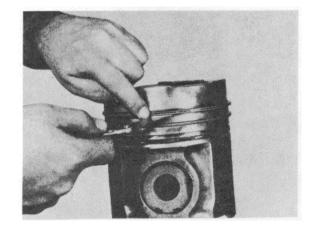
C-35. Check the Piston Ring Groove for WearB. If the gauge enters the groove without forcing or disengaging the ring, the wear is excessive and the piston is not to be used.
